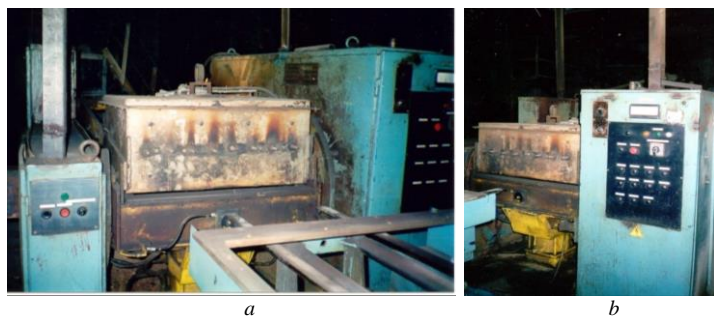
The moulding machine of the brand 51713, retrofitted with a press plate in the hopper: a – from the side of the hopper and the model plate; b – from the side of the control panel
